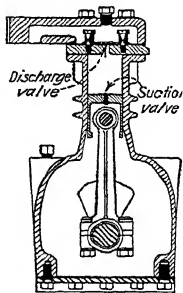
Kelvinator compressor with suction valves in piston head.
